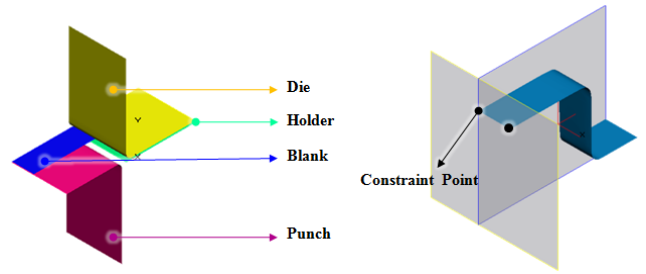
Finite element model of the tools and the blank for the stamping analysis of the U-draw bending
